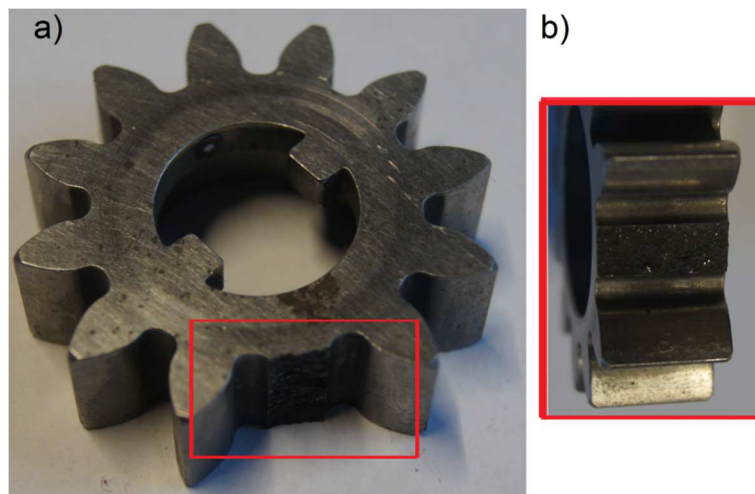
a) Damaged gear (driving wheel) b) decrement by damaged tooth
